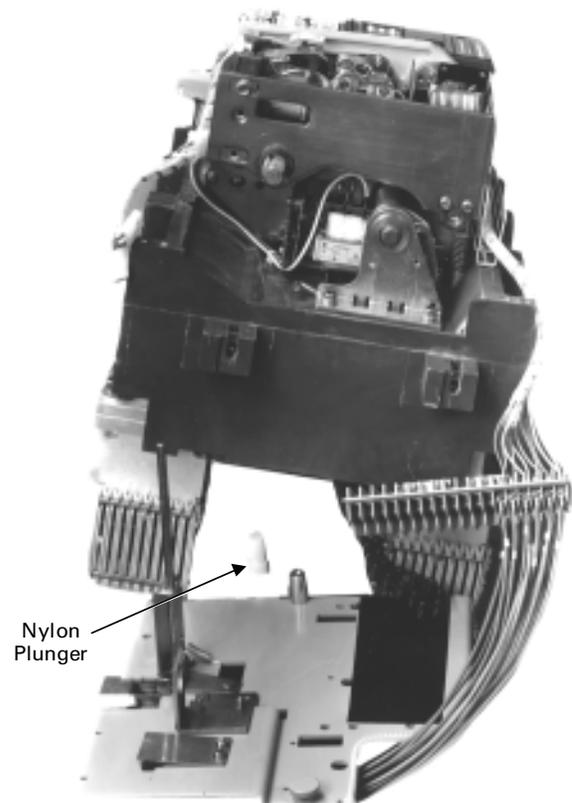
Breaker resting on its back, ready for installation of the Motor Operator Mechanism.
